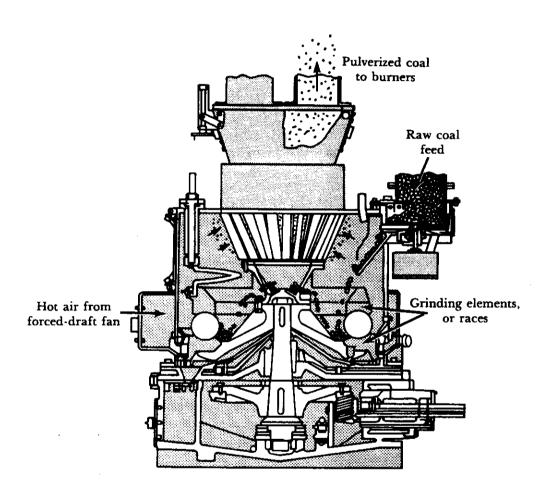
Contact mill using balls and races used to pulverize coal.
